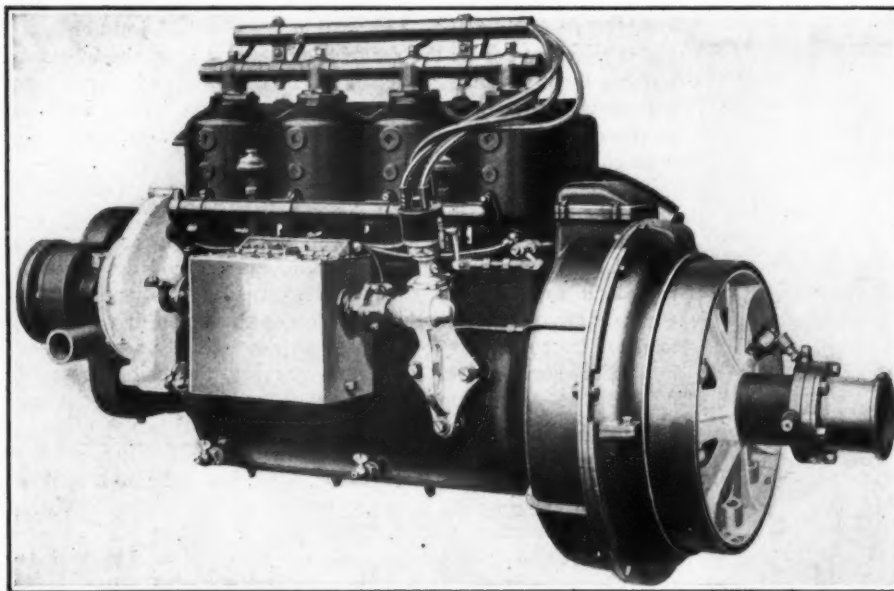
Mounting of new mechanical oiler, showing longitudinal shaft drive and cone clutch
